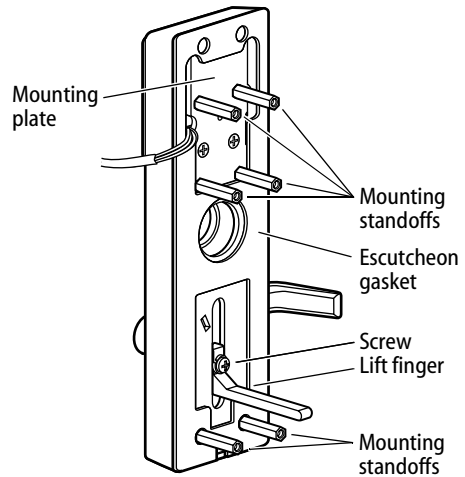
Removing and reinstalling the mounting standoffs, gasket, and lift finger
